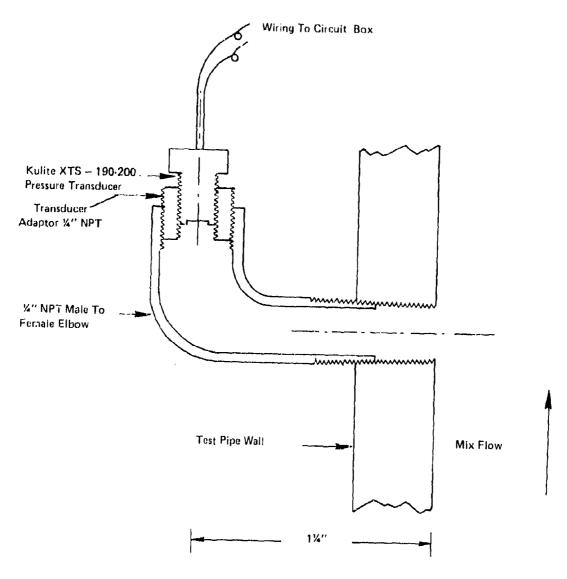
DETAIL OF PRESSURE TRANSDUCER MOUNTING
